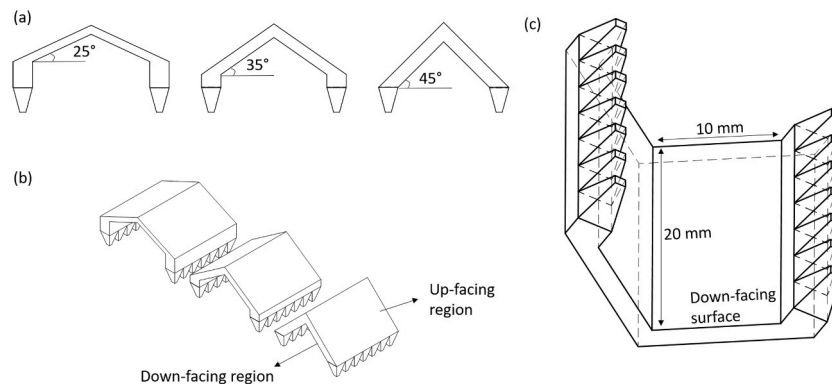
(a) Front view of manufactured test pieces showing all three printed angles (25°, 35° and 45°), (b) isometric view of printed test pieces and (c) view of down-facing surface of all test pieces.
